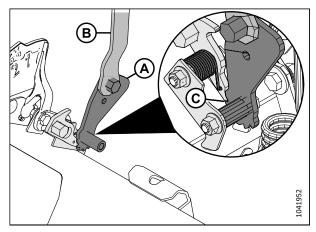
Multi-Tool Engaged with Left Float Setting Assembly
